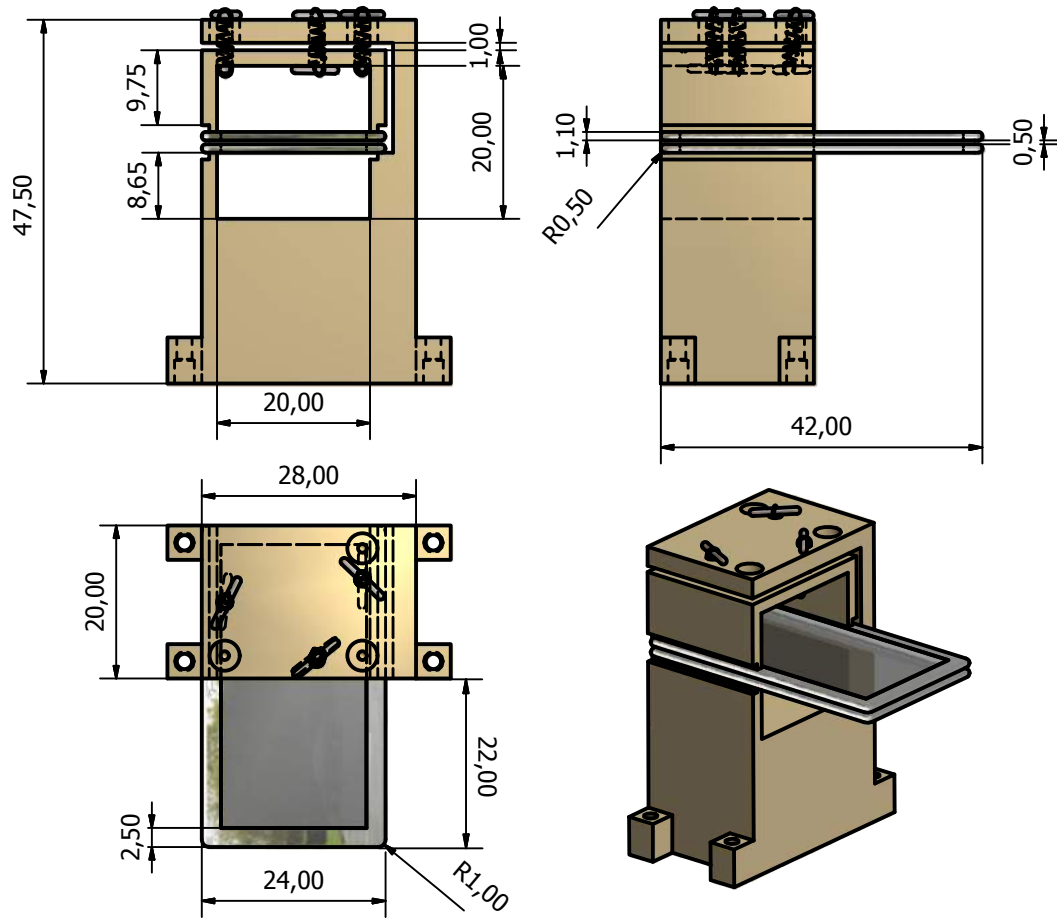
Detailed drawings of the adjustable capacitor assembly design for the ITO coated electrodes.
